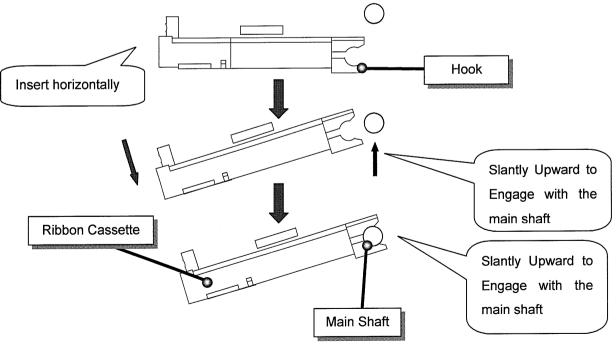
Reattaching to the Main Shaft (Ribbon Cassette Sectional View)
